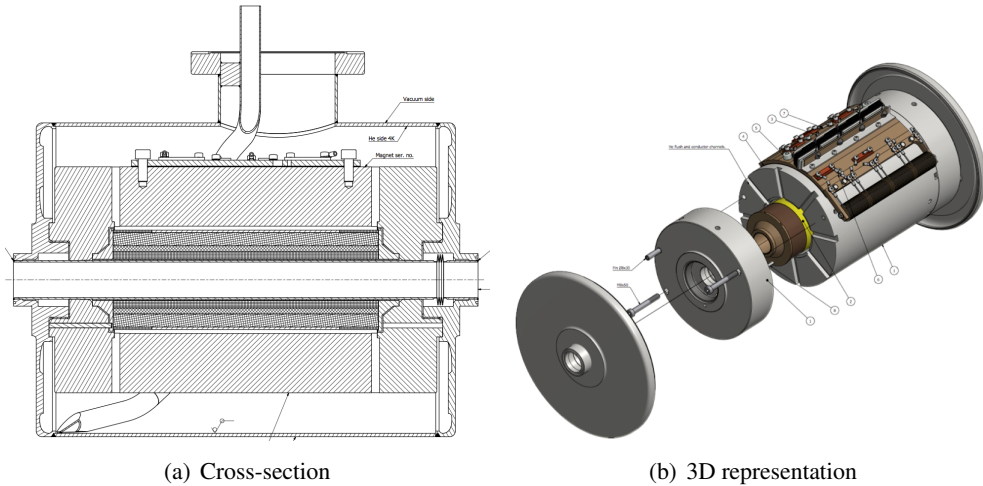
Mechanical drawings of the SC solenoid in the HIE-linac.
